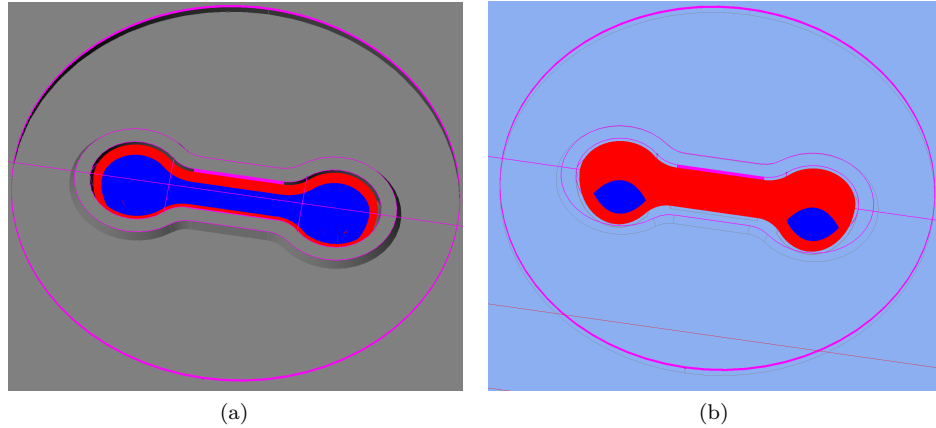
Micro-EDM tool path for machining of die for cardan-shaft.
